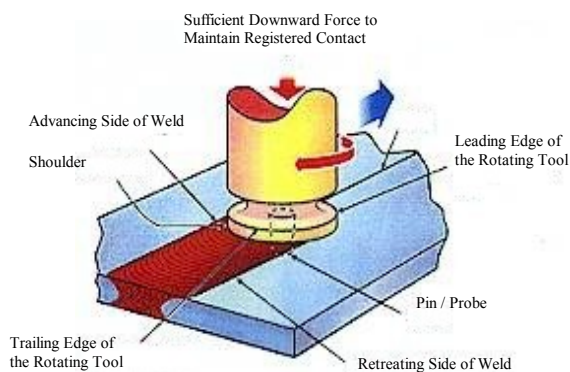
FSW Process in a Butt-weld Configuration
